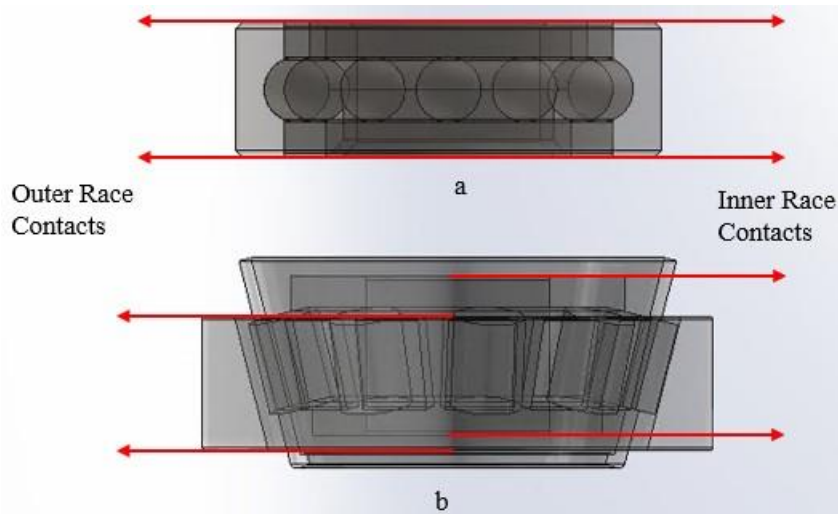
Example of replacing ball bearings with tapered-roller bearings. (a) Previous ball bearings with aligned contacts of the inner and outer races. (b) Tapered-roller bearing with contact offsets between the inner and outer race. The part replacement results in spacer and part modification.
